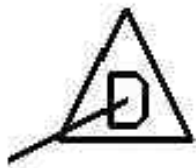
Leader Draws To Center But Should Draw To Triangle Edge
